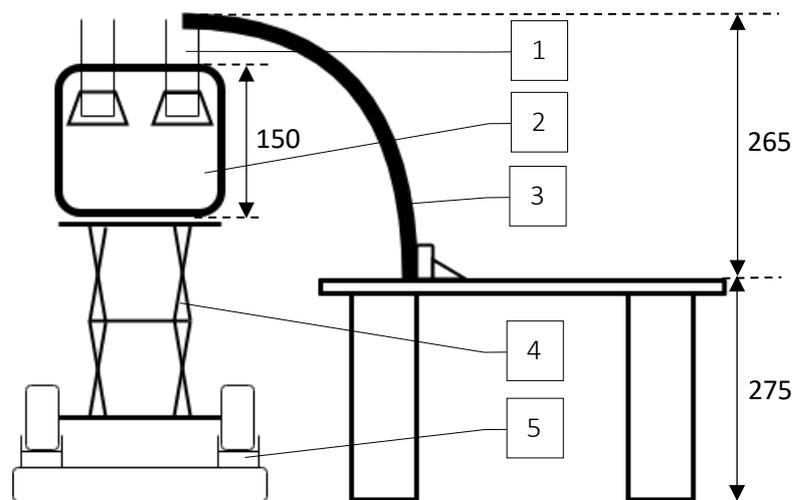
Sizes on scheme of delivery system. 1 – Drone’s grabbers; 2 – Cargo box; 3 – Legs of drone; 4 – elevator trolley with scissor mechanism; 5 – rails for the trolley. Dimensions are given in millimeters.
